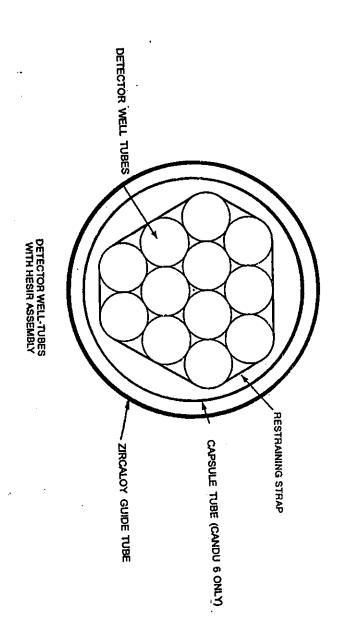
Pt-Clad SIR In-Core Flux Detector and Assembly Well-Tubes
